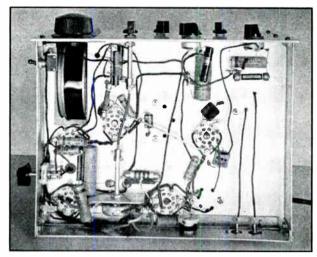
BOTTOM VIEW OF THE FIVE-TUBE RECEIVER
